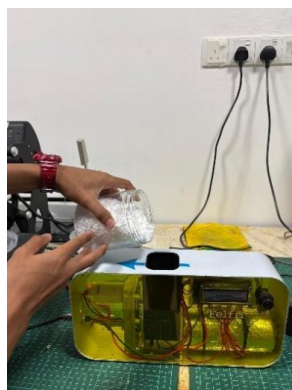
Filament extrusion using Felfill Evo Pro machine
